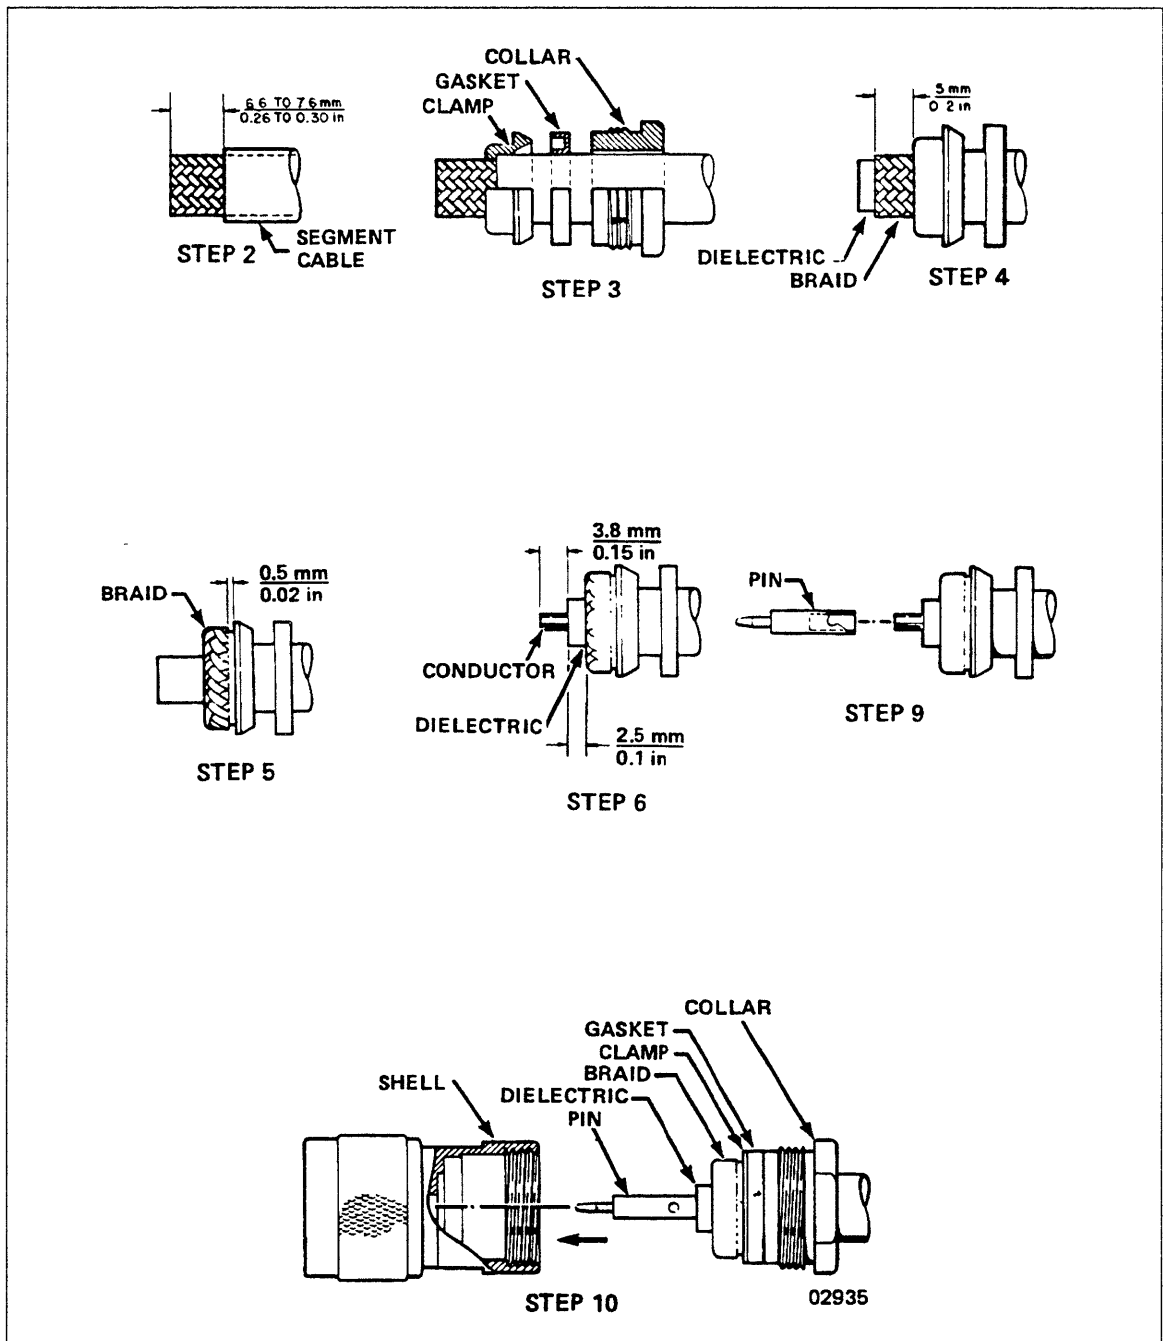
Installing a Solder-Type N-Connector Part 1
